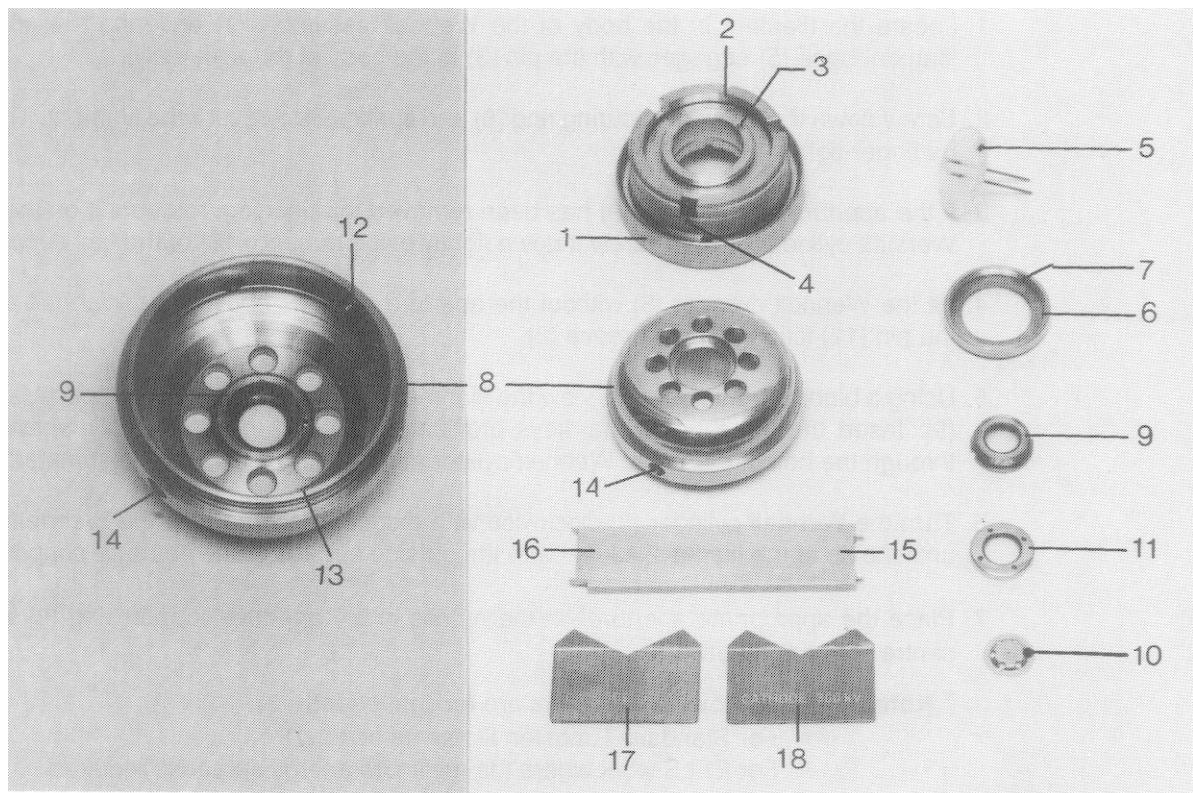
, Wehnelt assembly - Component parts and key for mounting and dismounting the aperture
